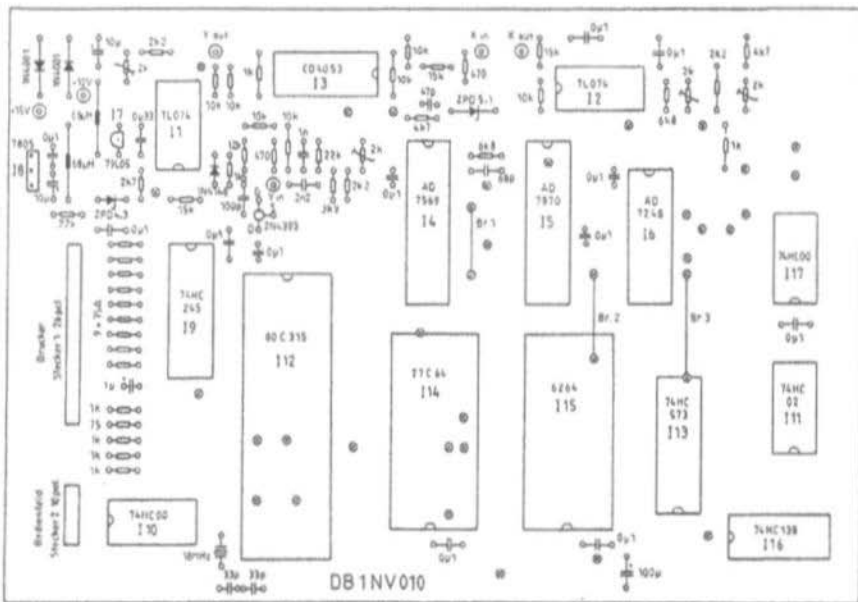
Component Layout for the Image-Store PCB DB1NV 010
